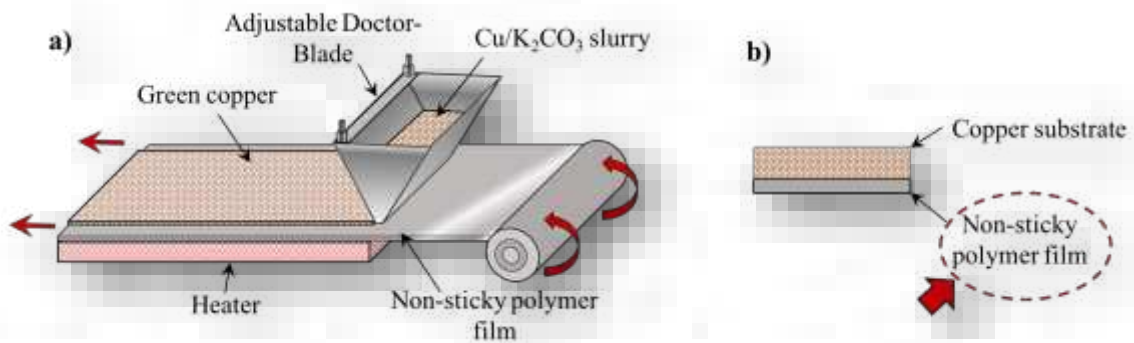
Schematic diagram of the tape casting process, a) a viscous slurry inside the hopper directly tape cast on to a moving dense copper substrate through an adjustable doctor blade, and b) double-layered green tape before debinding and sintering.
